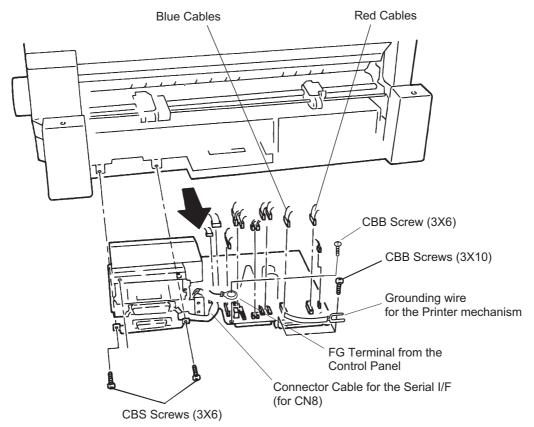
C210 MAIN Board and MAIN Frame Removal
